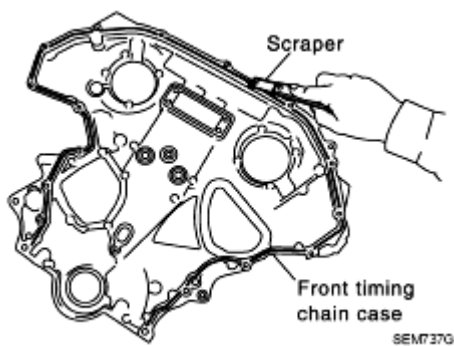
Removing All Traces Of Liquid Gasket From Front And Rear Timing Chain Cases, And Opposite Mating Surfaces
